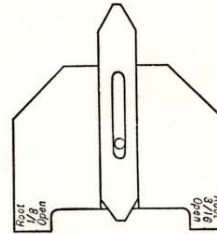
BUTT AND FILLET WELD GAGE, SHOWING METHOD OF USING.
